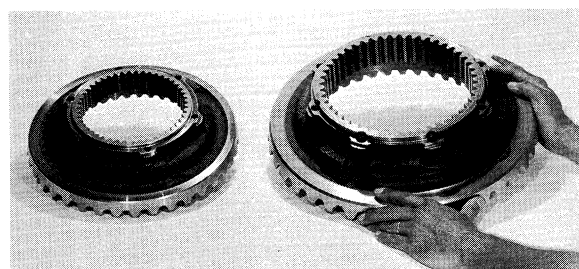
Large internal spur differential running gears that are broached to precision tolerances.
